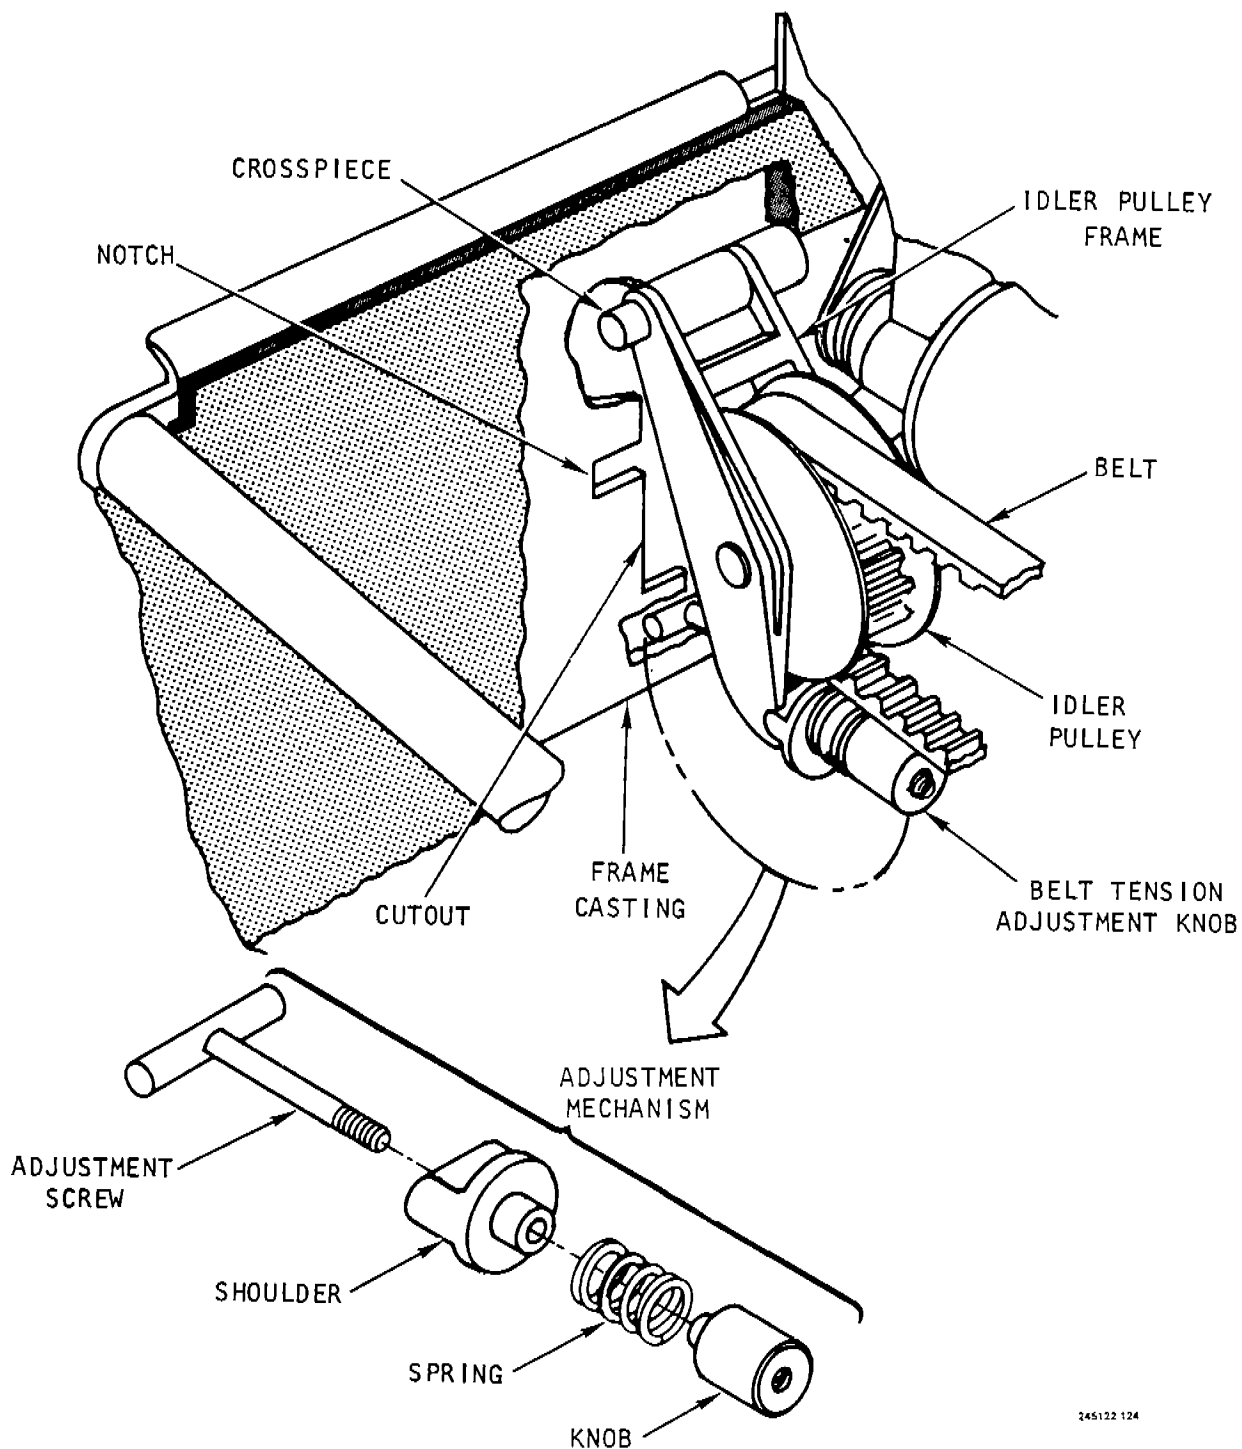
M-Series Idler Pulley Assembly Removal/Replacement
